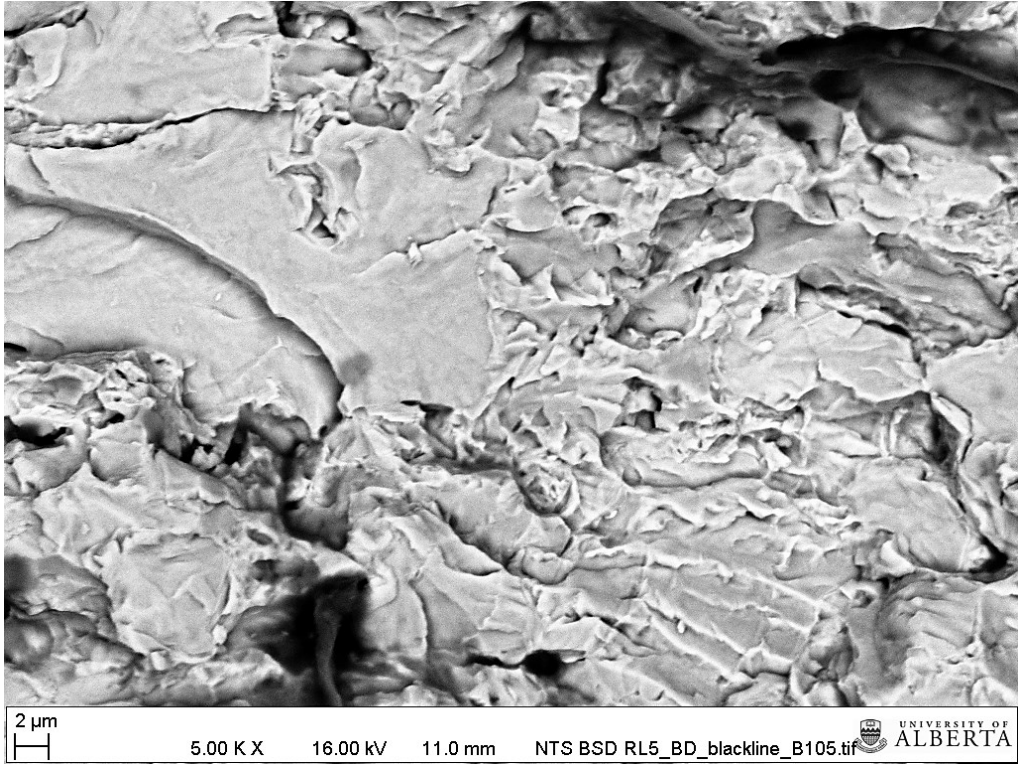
Fracture surface morphology in the corrosion fatigue region, showing quasi-cleavage fracture mode
